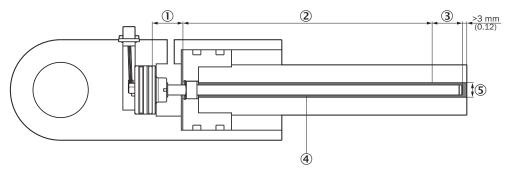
Encoder installed in the hydraulic cylinder – MAX48
